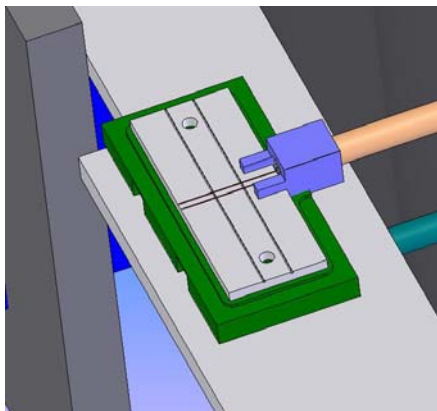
Bolts removed (nuts left in place) after inconel plate resistance welded to weld pad
